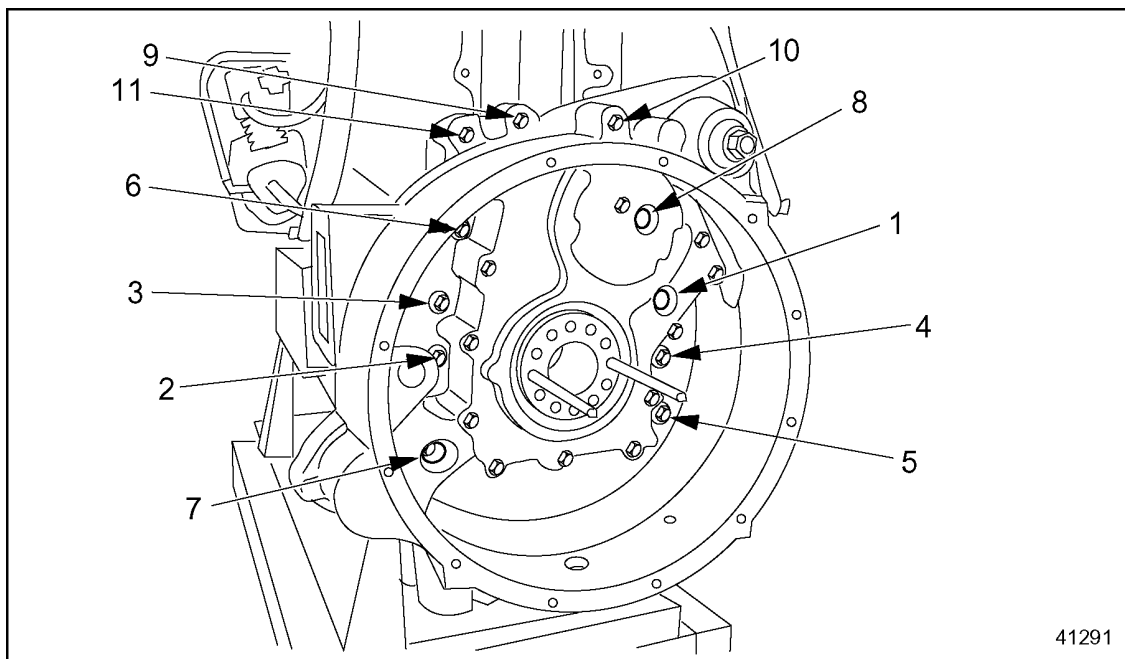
Flywheel Housing Bolt Location and Torque Sequence
